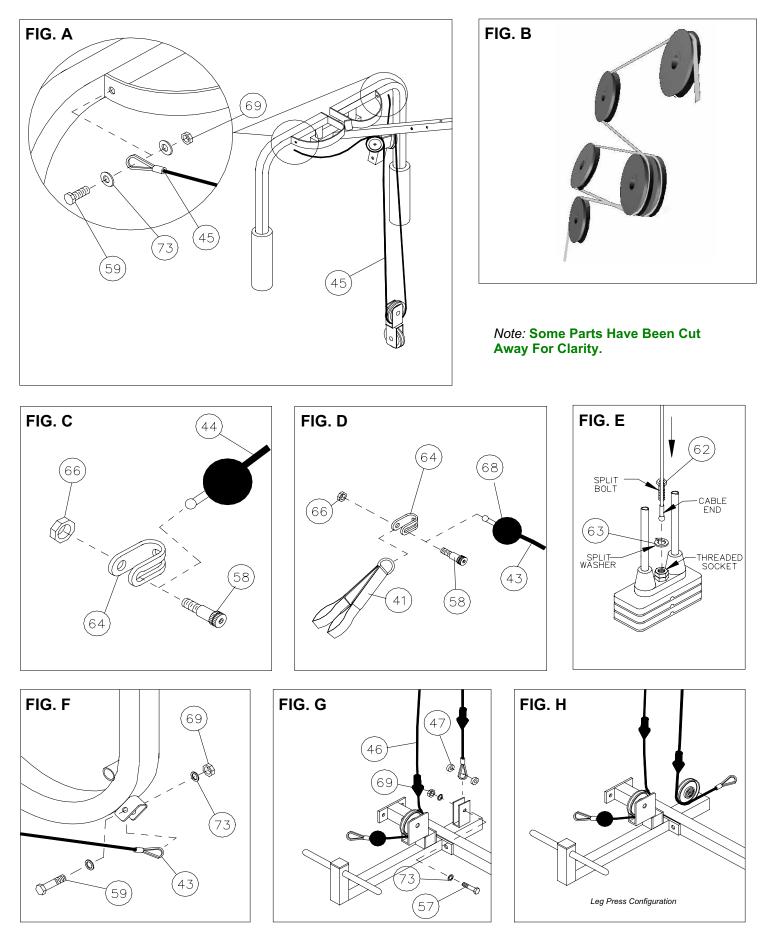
Finally, connect the other looped end of the Short Cable (#46) to the empty pulley bracket located on the Base Frame (#1), as shown above. Refer to Fig. G on page 16 for proper assembly. Secure this assembly using one Hex Head Cap Screw 3/8-16 X 1 3/4 (#57), two Flat Washers SAE 3/8 (#73), two Nylon Spacers 3/8 x 3/8 (#47) and one Nylon Insert Jam Lock Nut 3/8-16 (#69).
